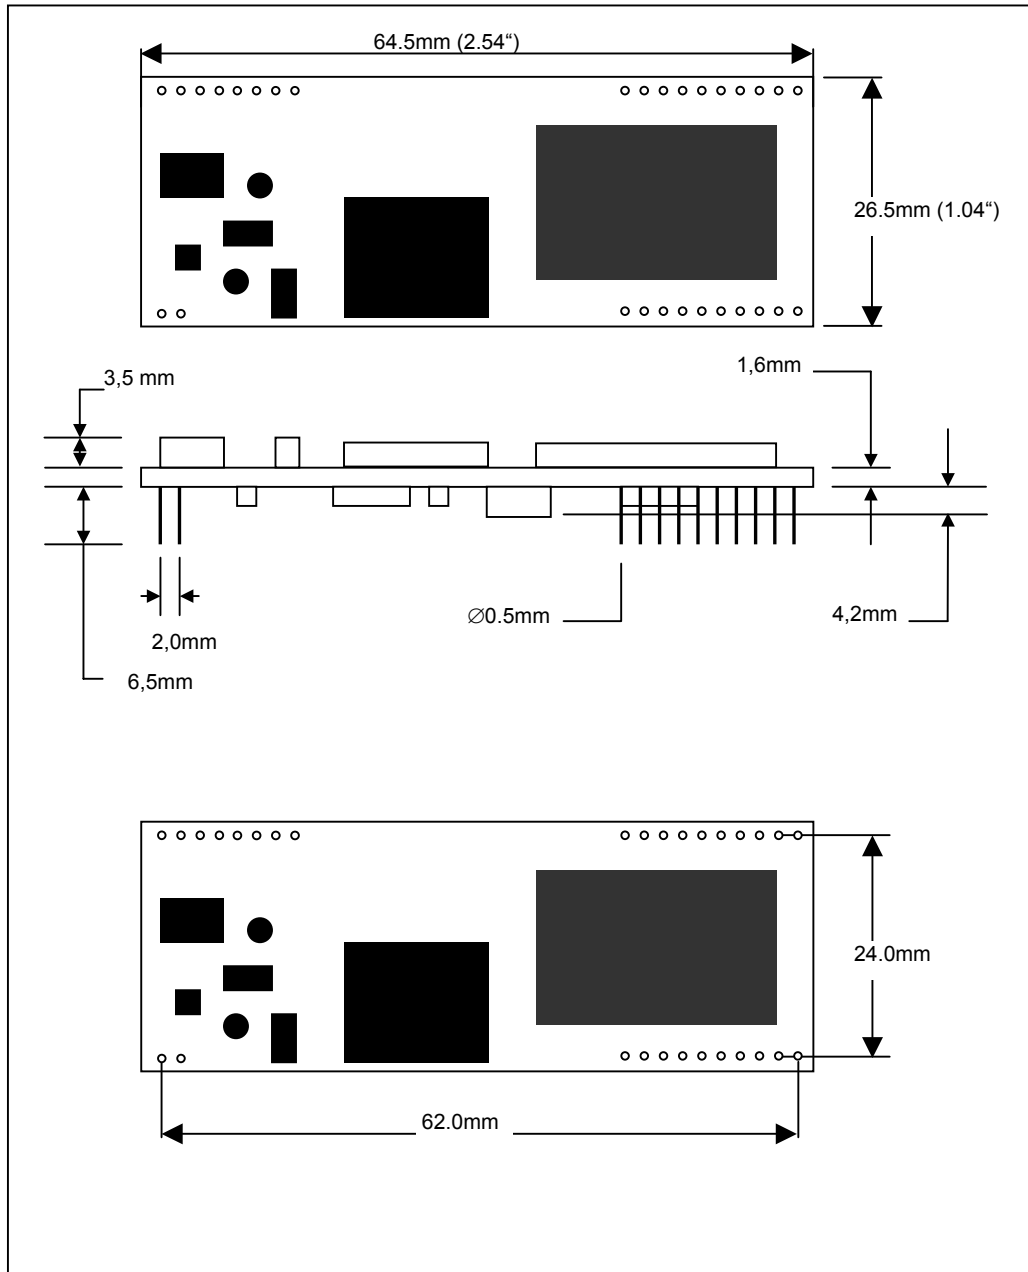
AL3032S / AL3034S / AL3090S Socket Modem Physical Dimensions
